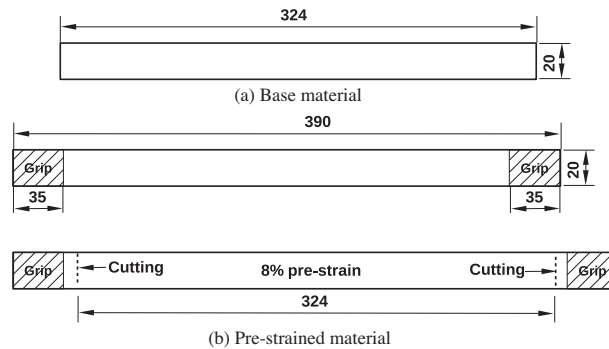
Dimensions of three-point bending specimen (unit:mm), where δ is the prescribed engineering strain.
